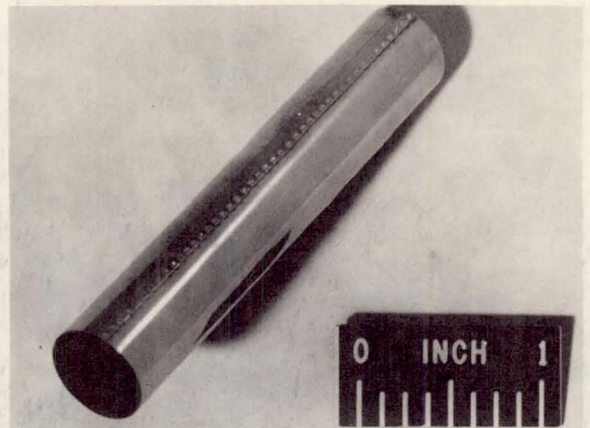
0.005-Inch-wall tungsten cylinder. Electron-beam spot welding.
